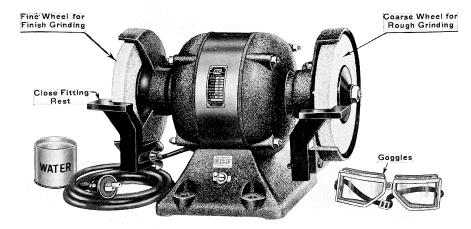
A bench grinder suitable for grinding lathe tool cutter bits.
